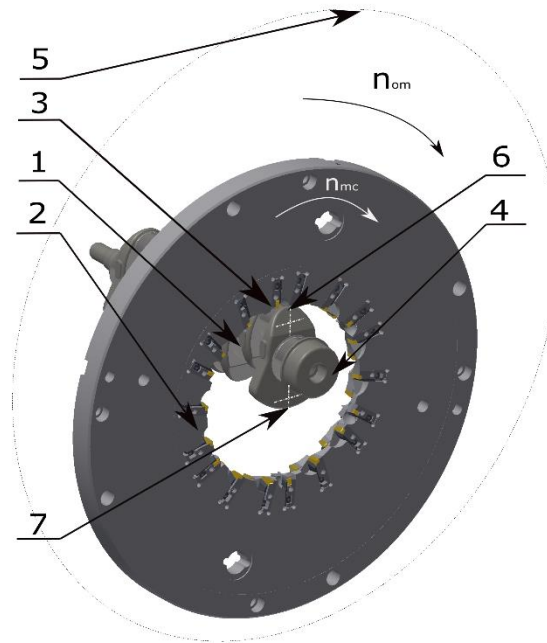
Scheme of planetary milling of crankshaft's crankpin using internal disc milling cutter:
